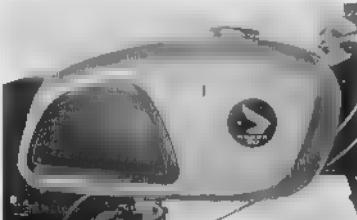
B Fuel tank (C, 90) ① Fuel tank
